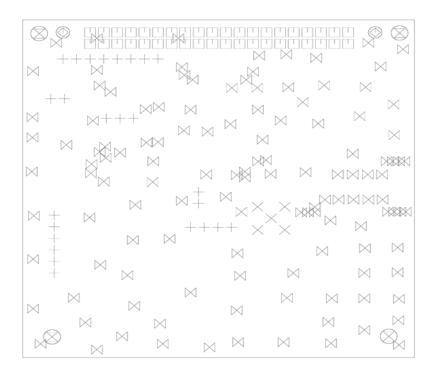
Infineon Evaluation Board V1.1 bottom side, solder mask
